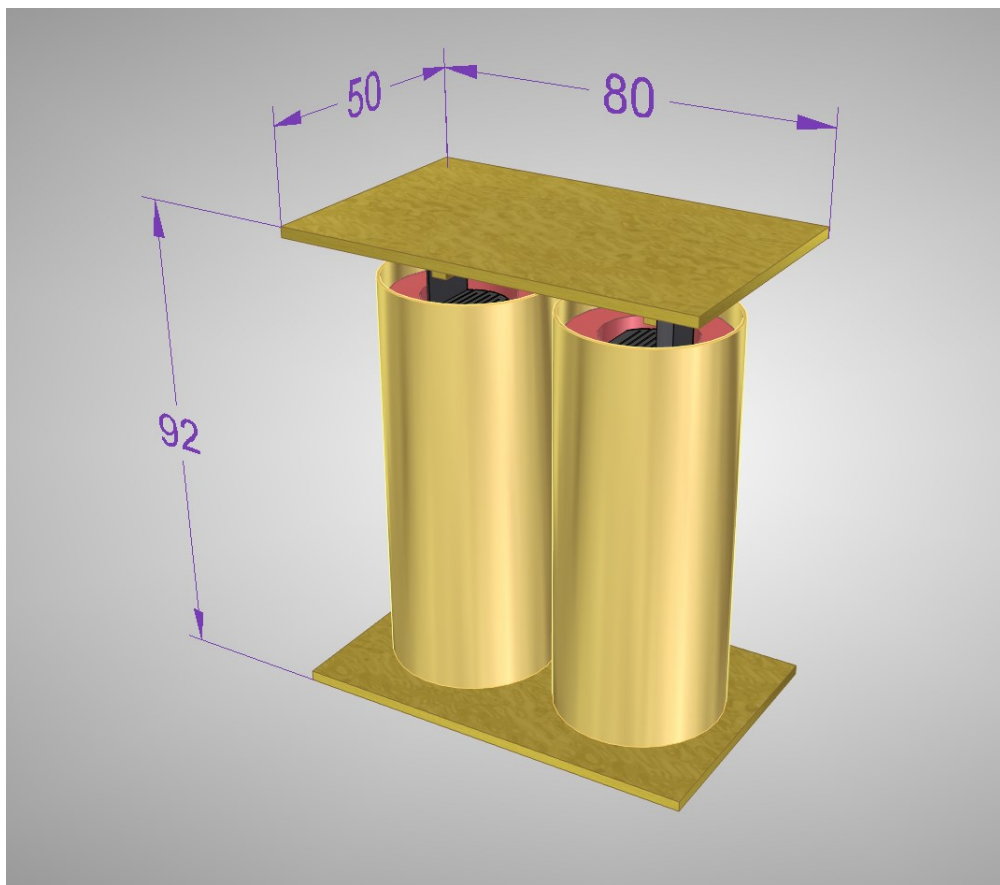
3D conceptual design for mini-ADR showing overall dimensions.
